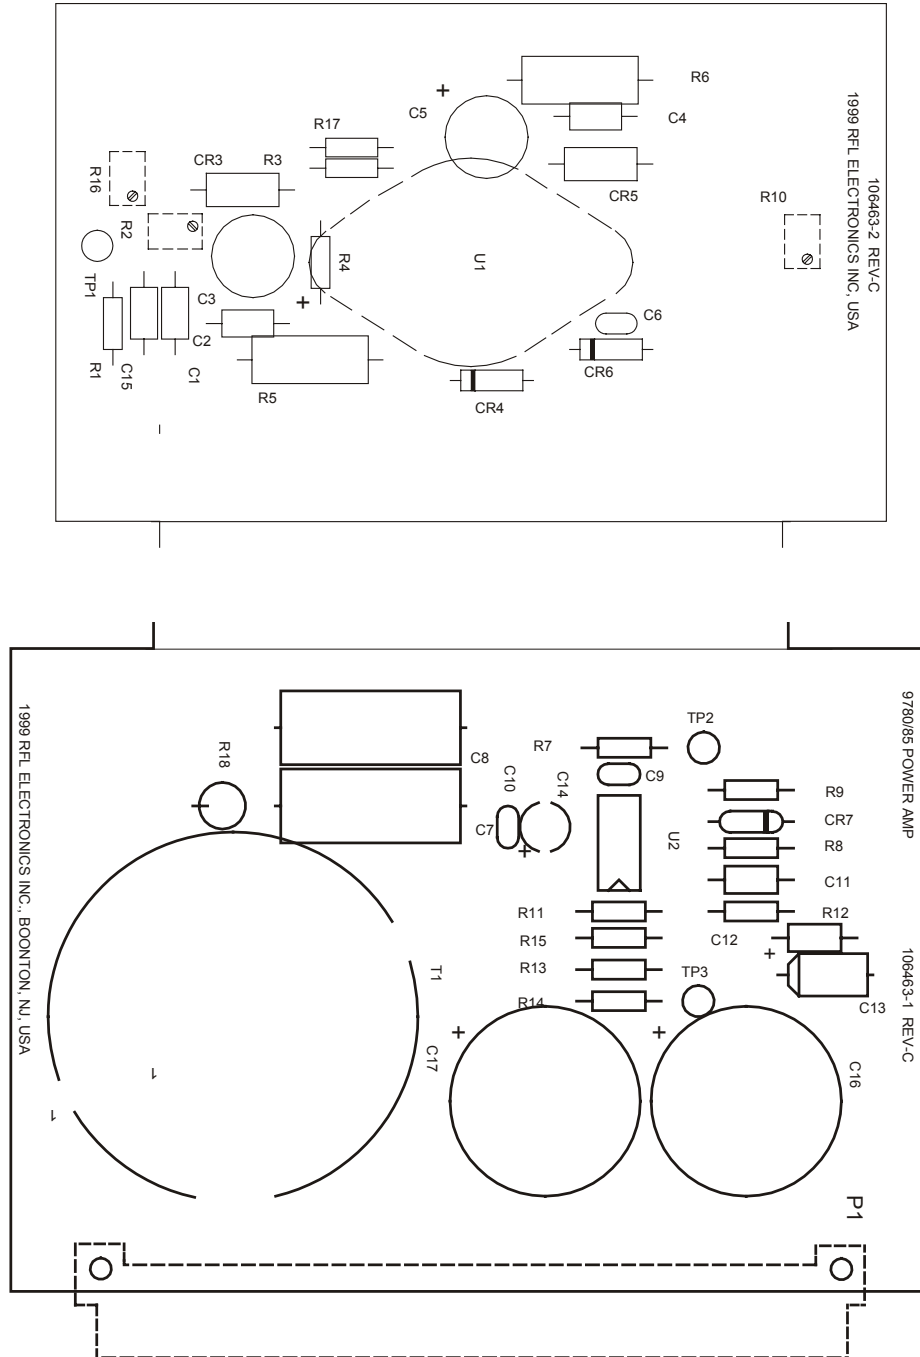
Component locator drawing, RFL 9785 Power Amplifier module
